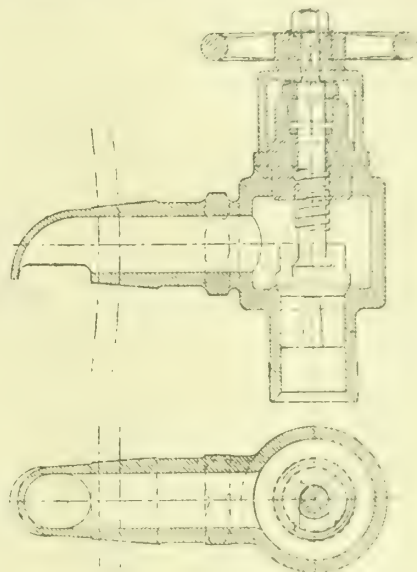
COMBINED BOILER CLACK AND BLOWING THROUGH VALVE.
